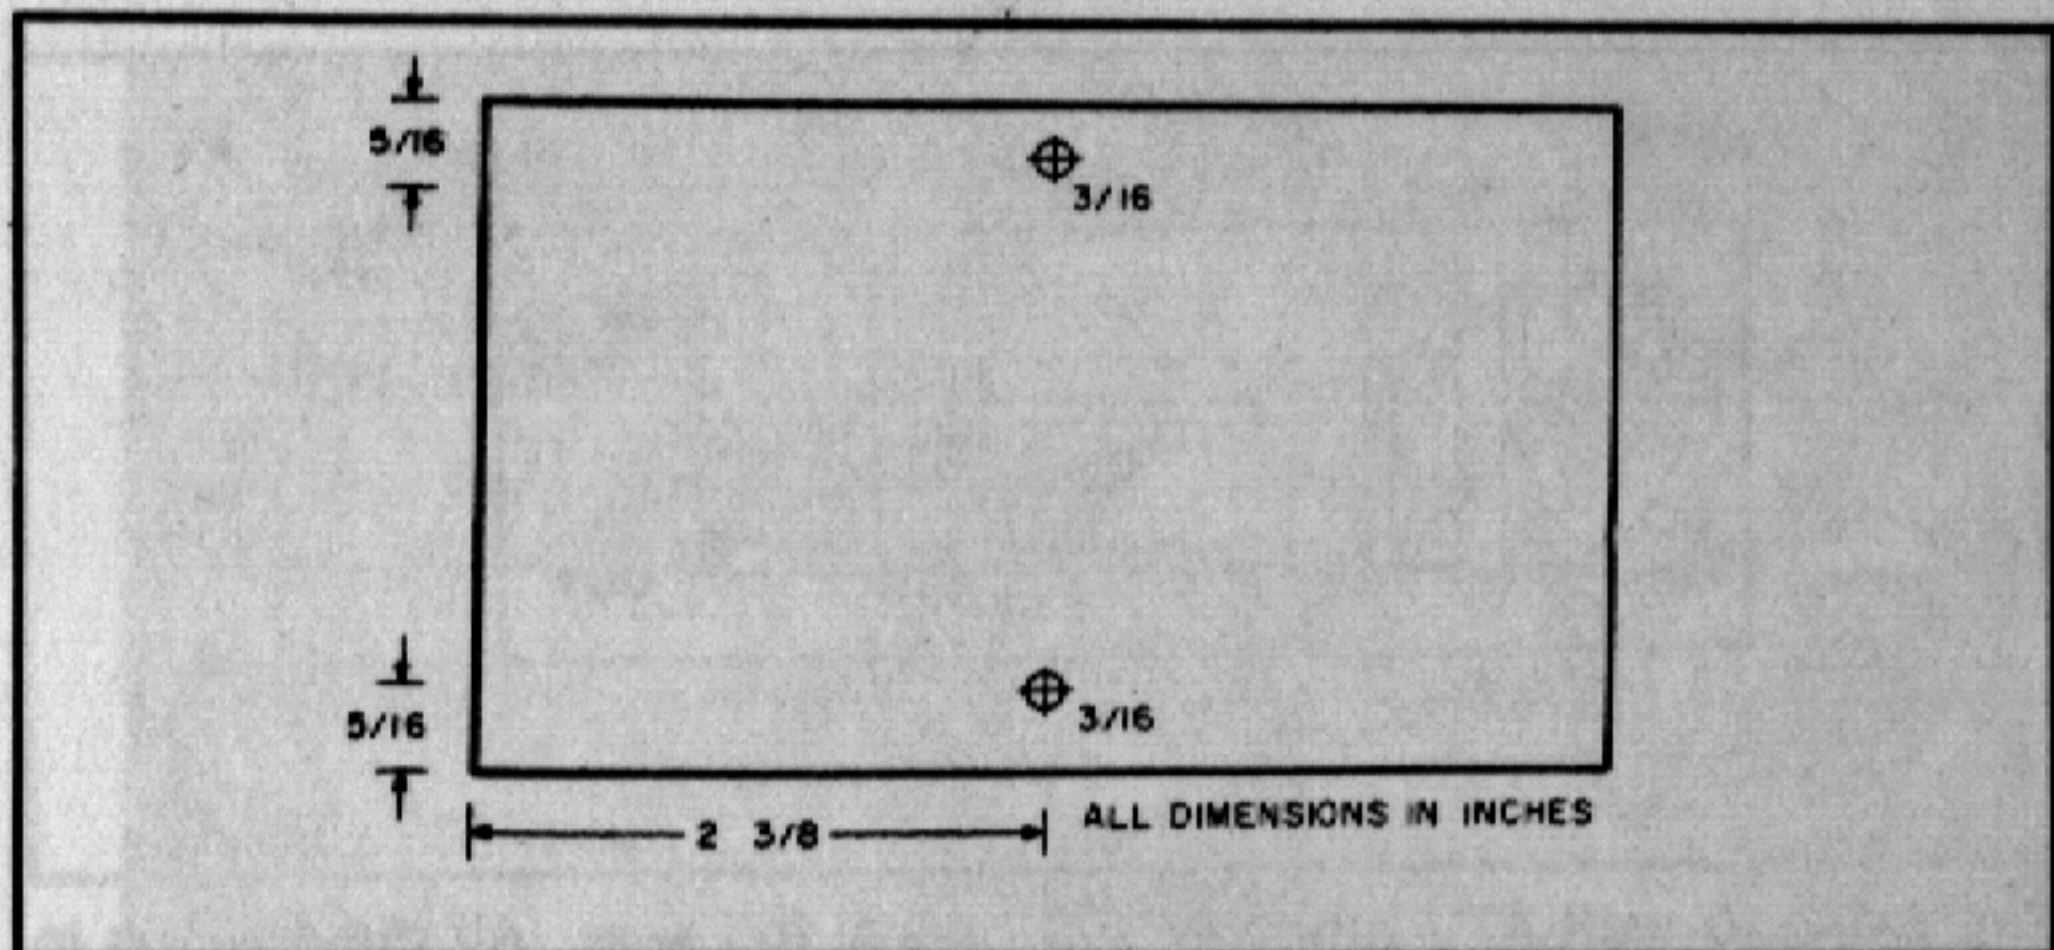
Heat sink drill guide. Heat sink is International Rectifier HE330-C or Wakefield 623-K.
